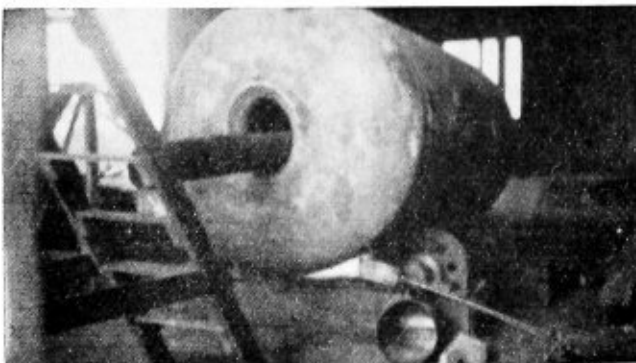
Welding inner "V" between fourth and fifth courses
